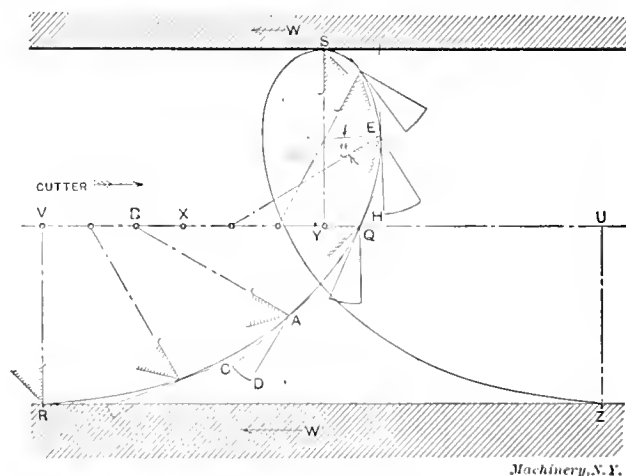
Path of Milling Cutter Tooth, when Feed is less than Circumference of Cutter.
